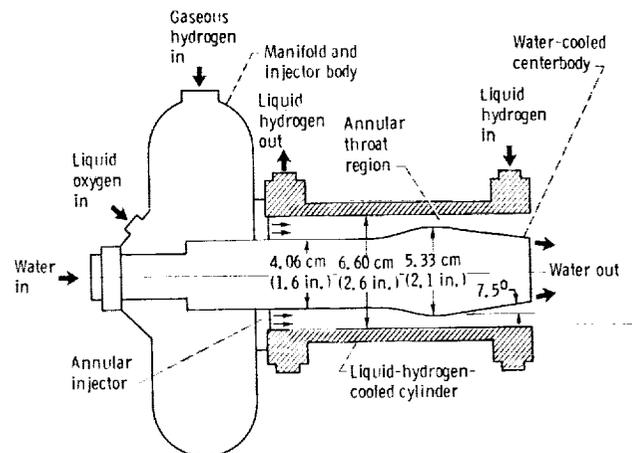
Schematic of cylindrical thrust chamber assembly.
